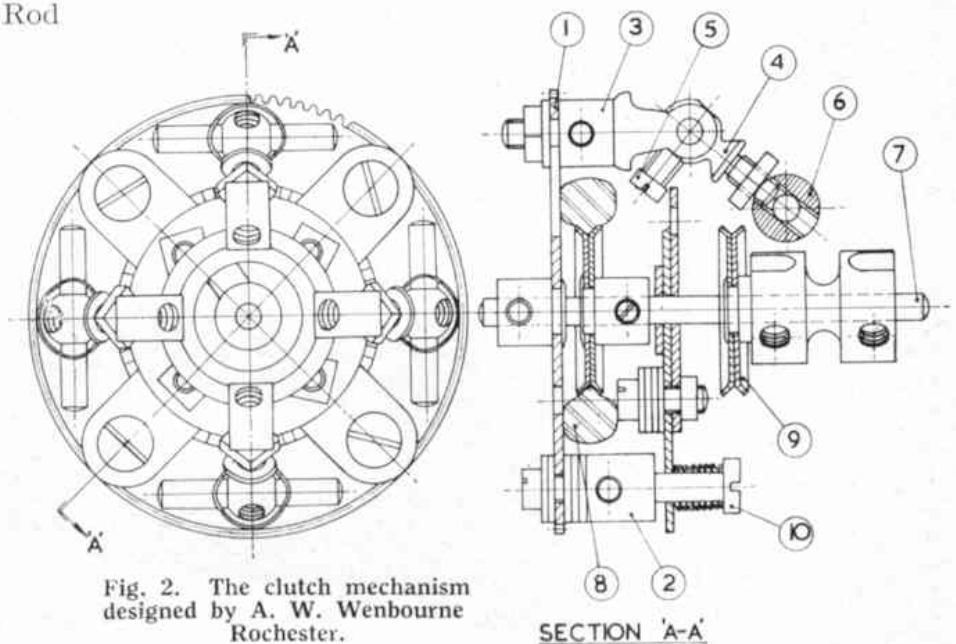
The clutch mechanism designed by A. W. Wenbourne Rochester.
